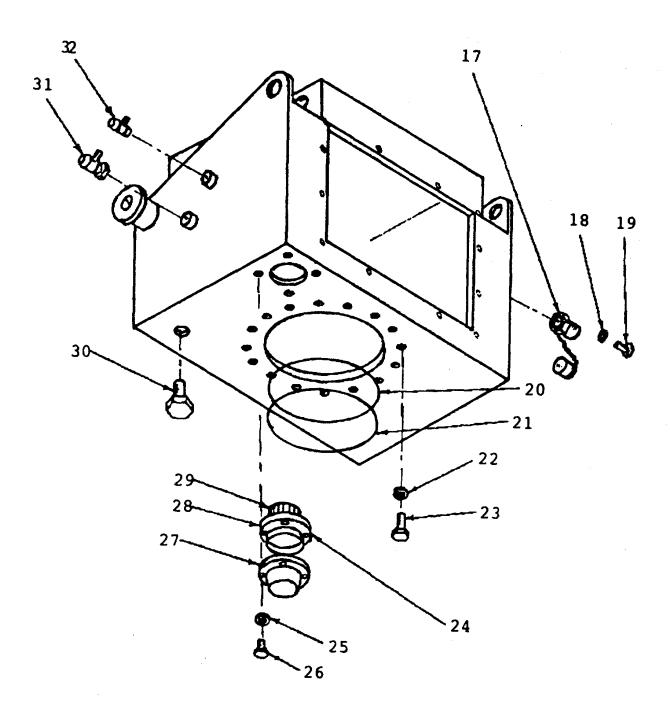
(2 of 3). Upper Outdrive Housing Assembly
